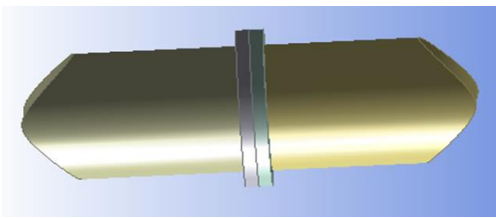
Design of Inlet nozzle and Outlet nozzle with Flanges
